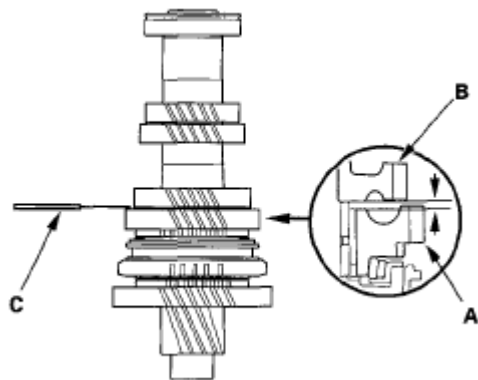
Measuring Clearance Between 2nd Gear And 3rd Gear With Feeler Gauge
